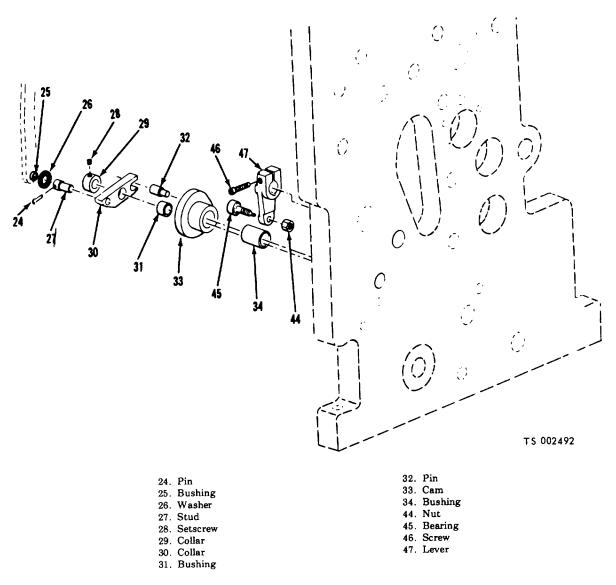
Water motion assembly (Sheet 3 of 6).
